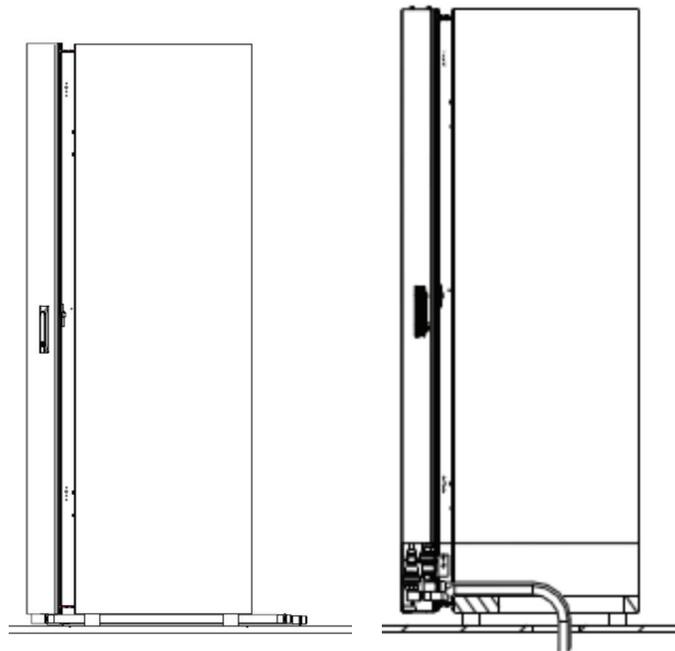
External right-angle hose kit (left) and Internal right-angle hose kit (right).
